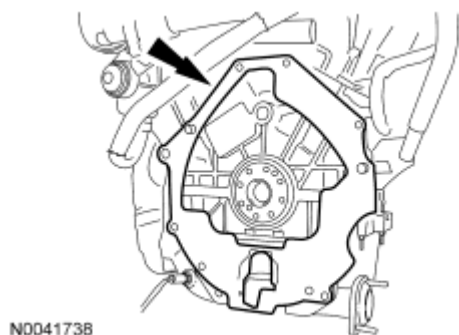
Locating Engine-To-Transaxle Separator Plate
